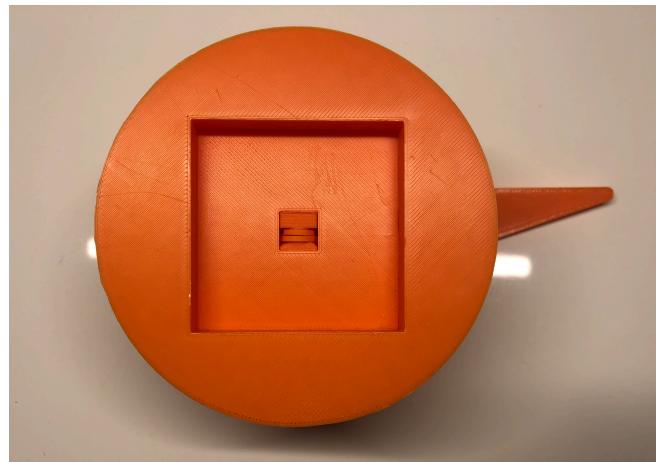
Showcase of the interior of the solid model of the final assembled device “The Wheel Roller”
